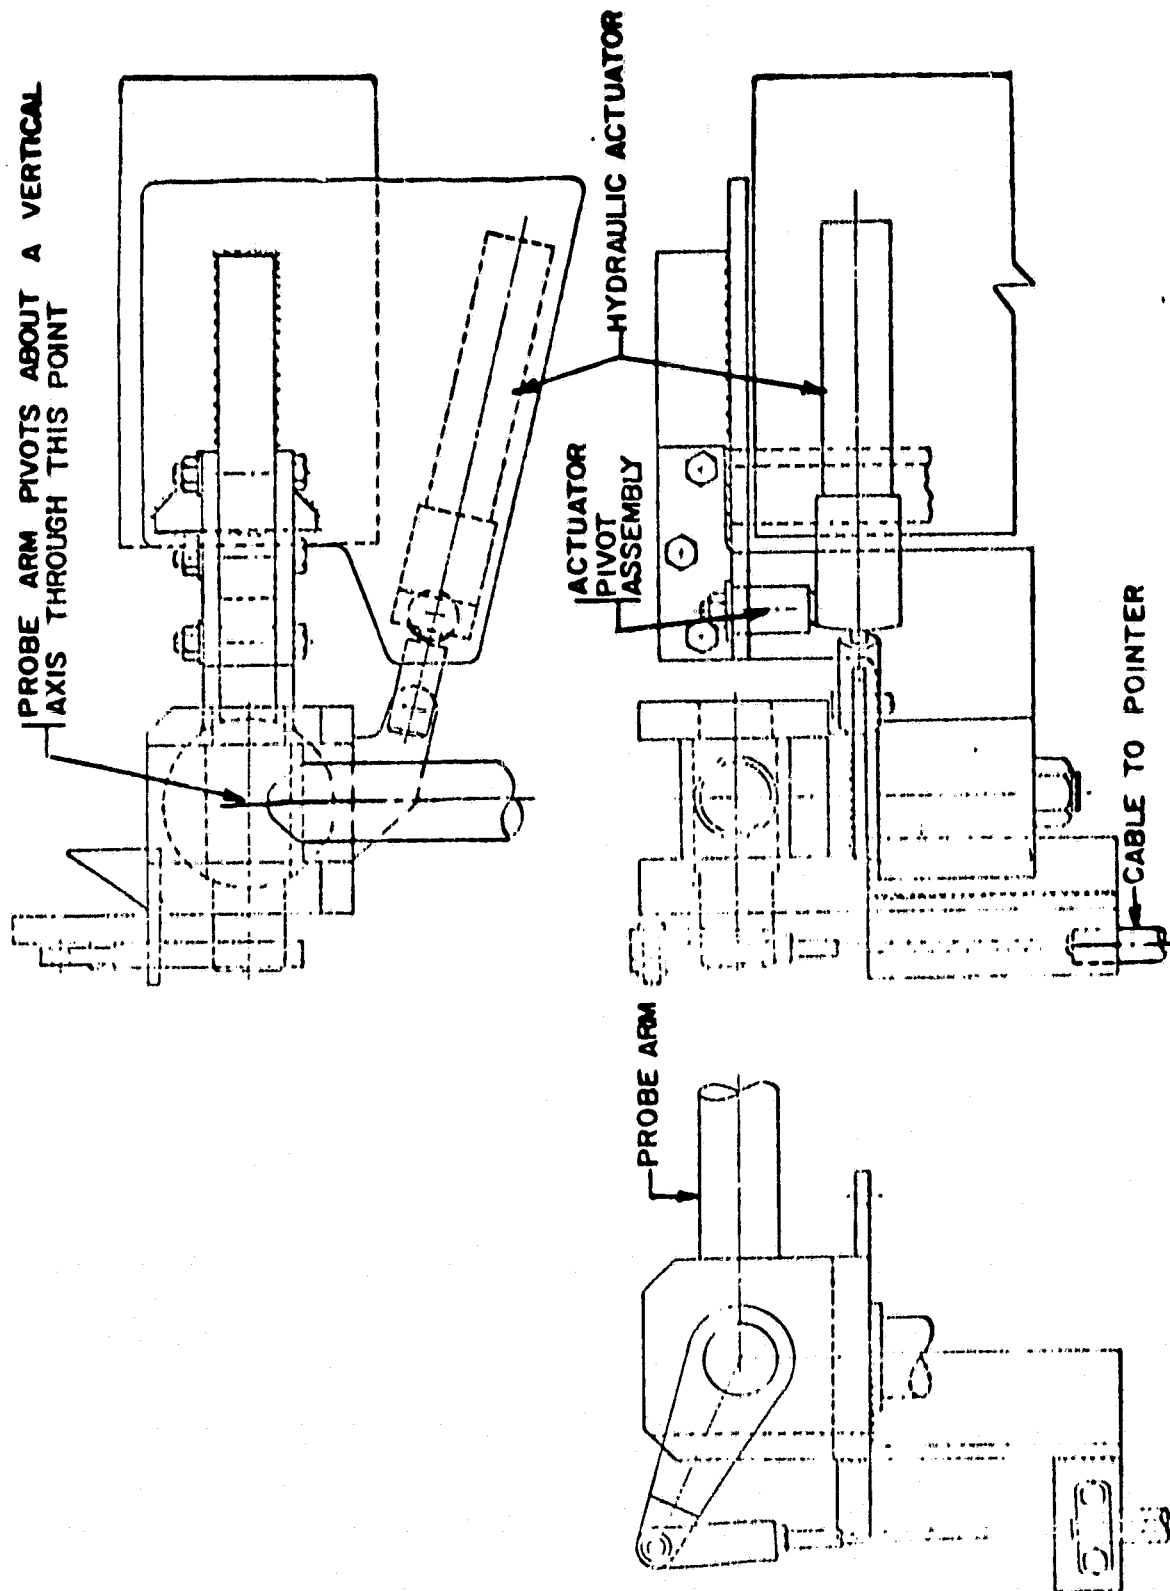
A HYDRAULIC ACTUATOR AND PIVOT ASSEMBLY
